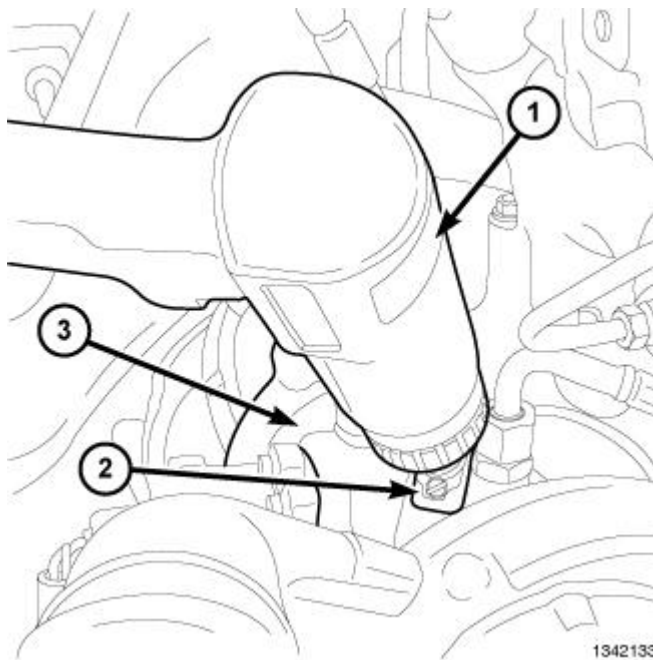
Drilling Hole Through Turbocharger Center Housing
